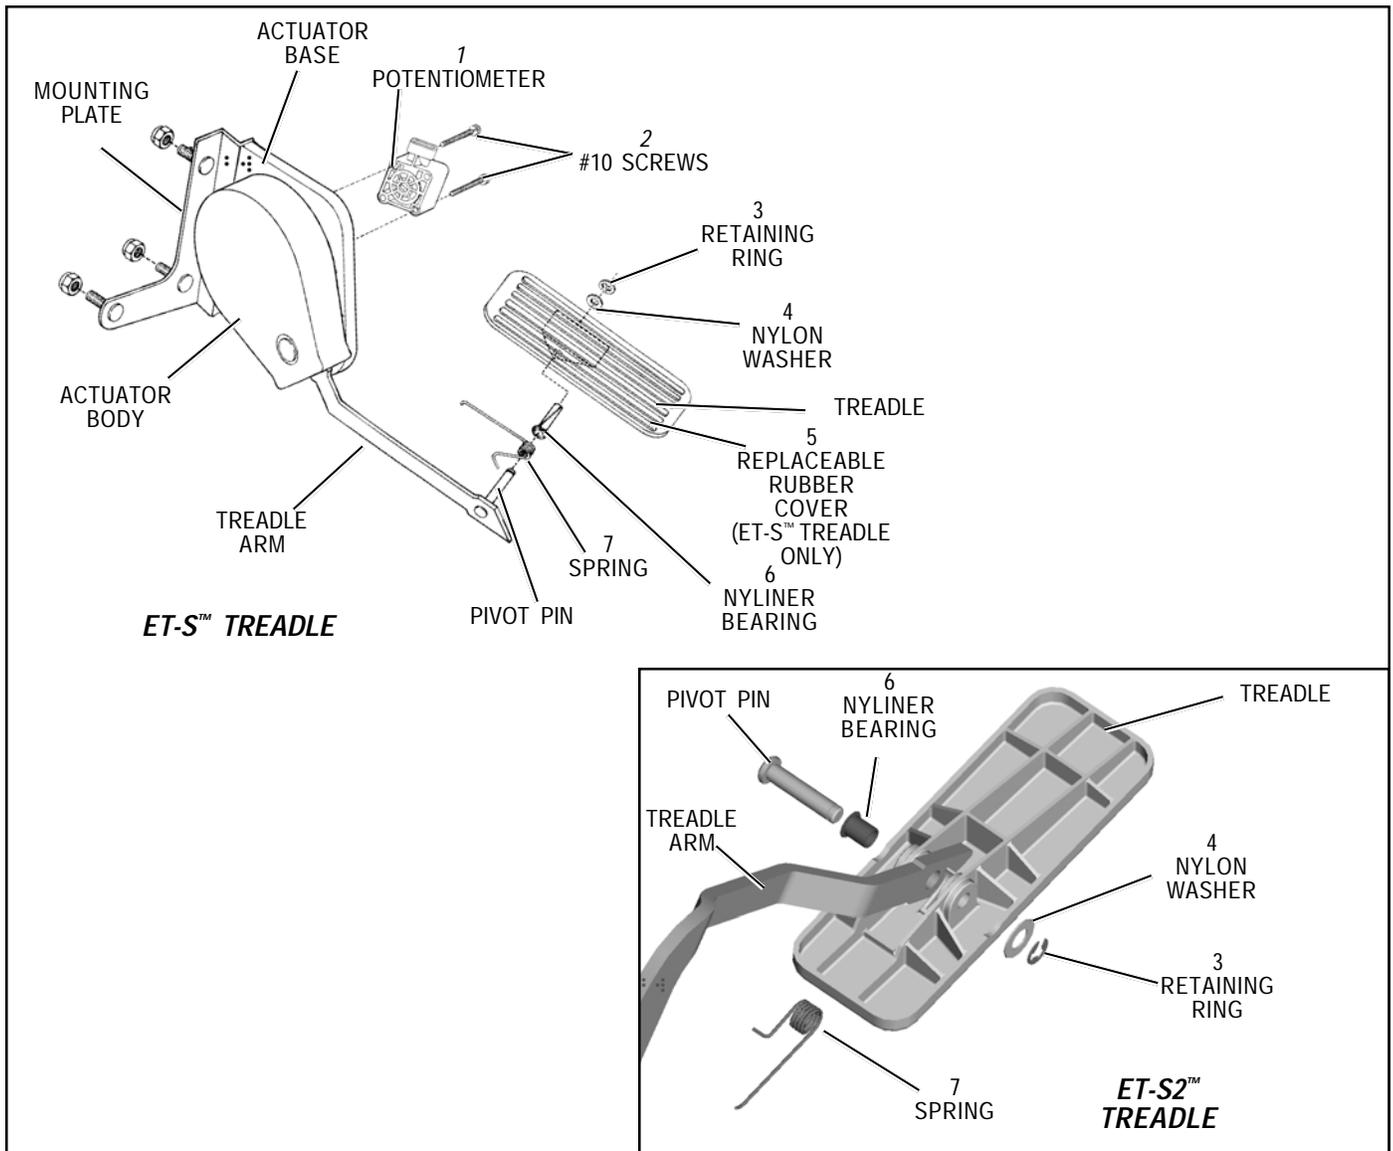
ET-S™ AND ET-S2™ TREADLE EXPLODED LINE DRAWING
